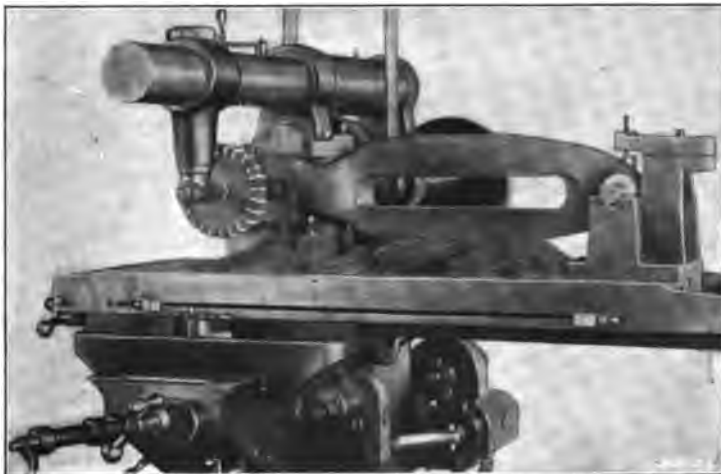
Finishing End of Rocker-arm with Straddle Mill
